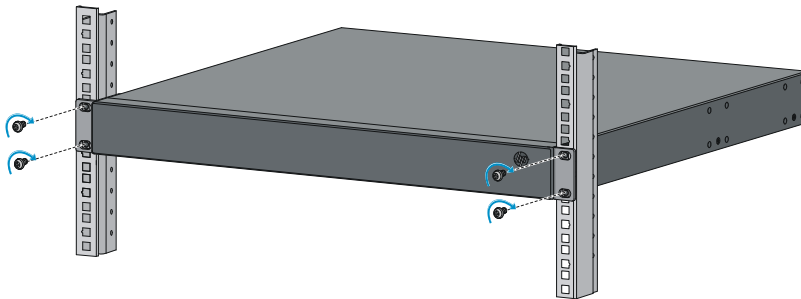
Mounting an HP 1950-24G-2SFP+-2XGT-PoE+(370W) switch by the rear mounting position
